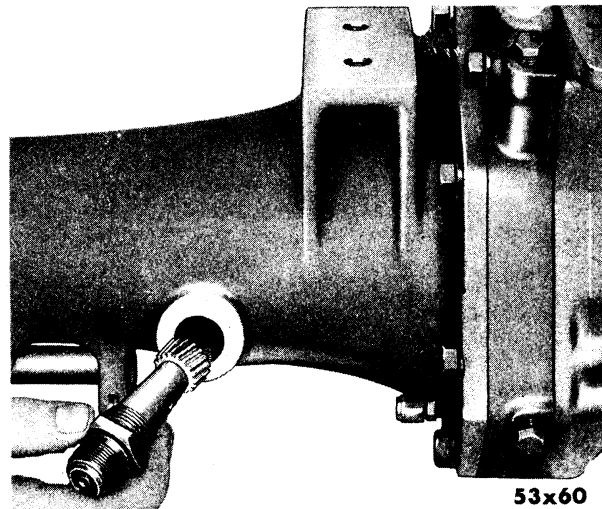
Removal and Installation of Speedometer Drive Pinion Assembly
